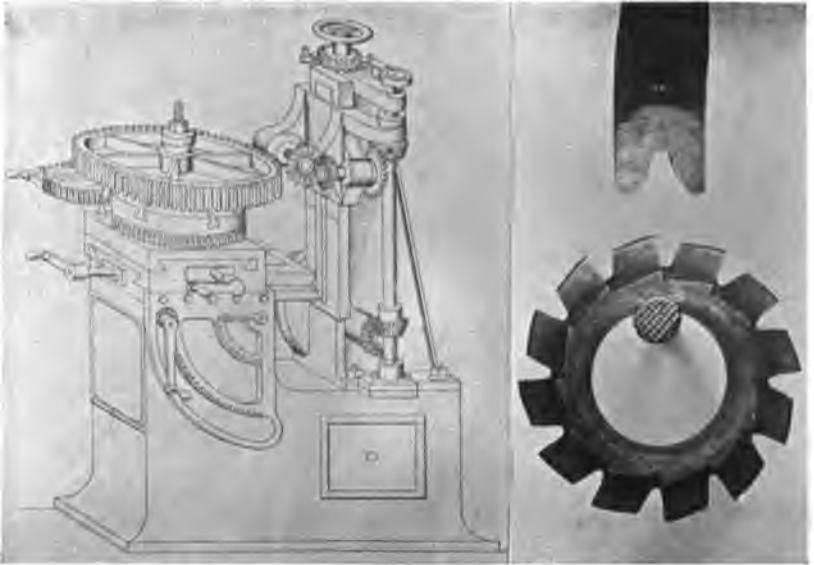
Spur-Gear Planing Machine.* (Gleason.)
